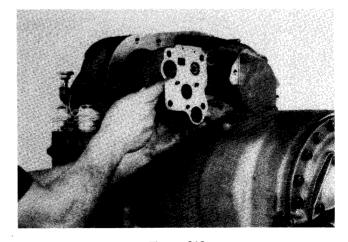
Install new "O" rings on pressure regulating valve. Position valve on studs.
